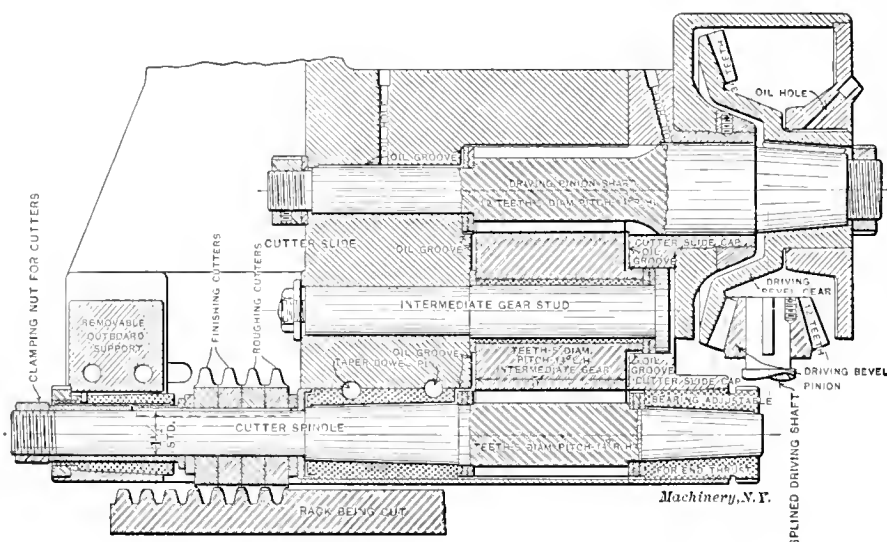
Vertical Section through Cutter Spindle and Driving Gears.
